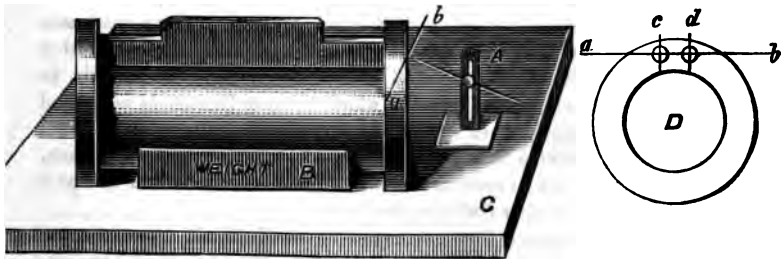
POSITION OF CYLINDER ON SURFACE PLATE, METHOD OF USING SCRIBER, &c.
